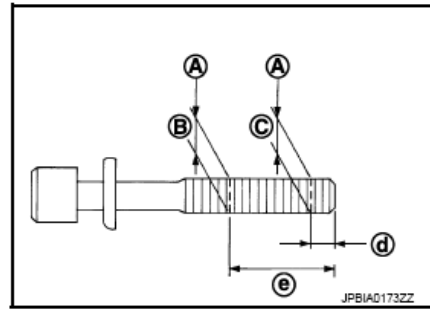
Identifying Cylinder Head Bolts Outer Diameter
